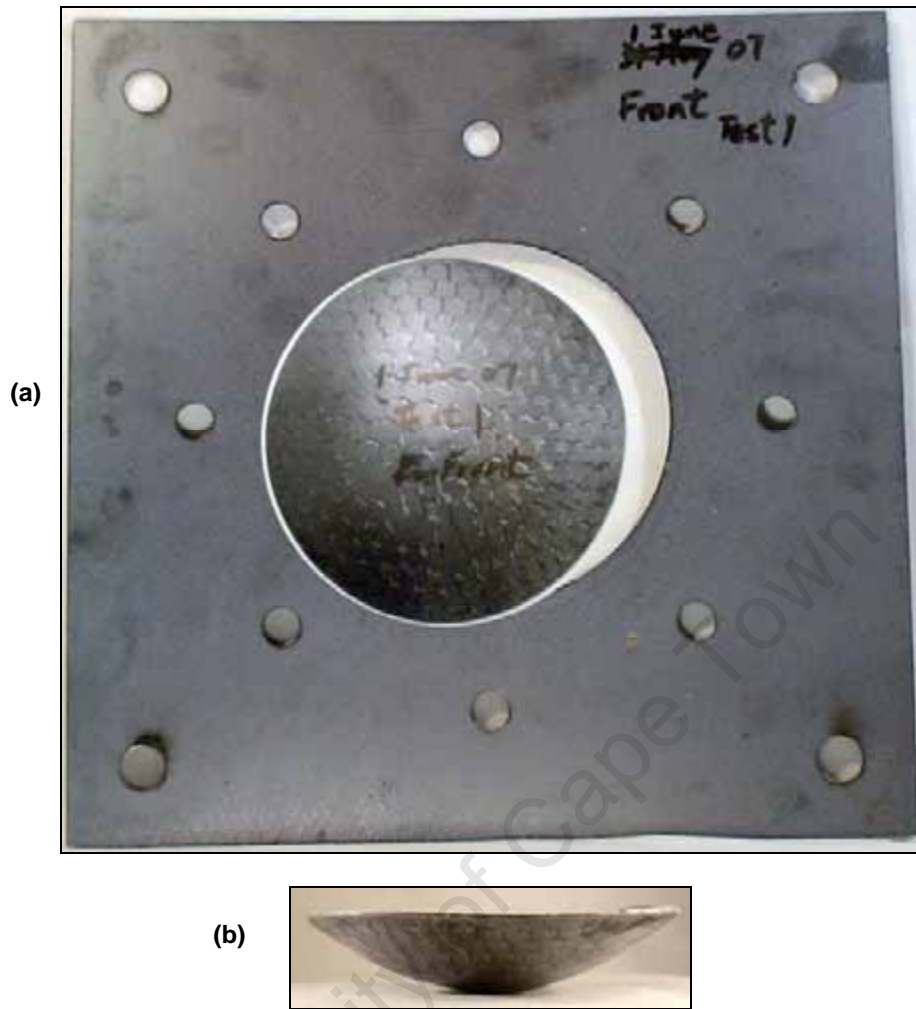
Complete tearing exhibited on specimen S29M22f, S29 sandwich, charge mass = 22g, impulse = 36.79Ns, front plate. The back view (a) and the side view (b)
